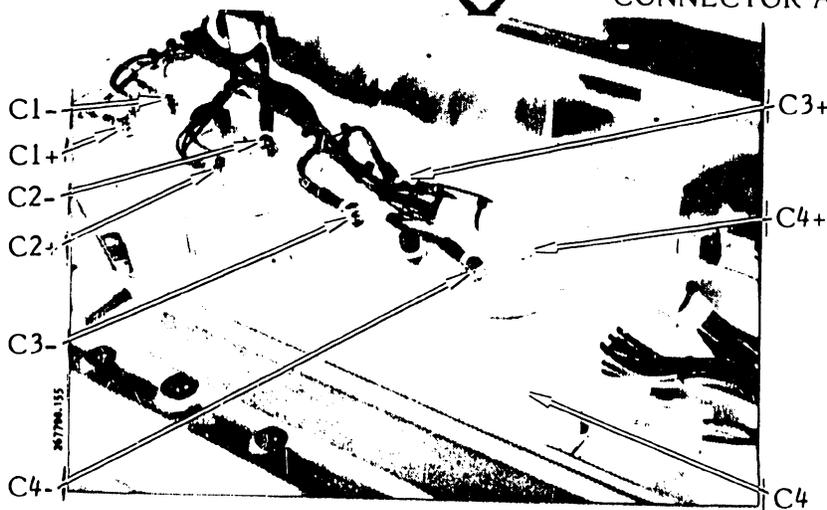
Capacitor Bank Assembly Removal/Installation
